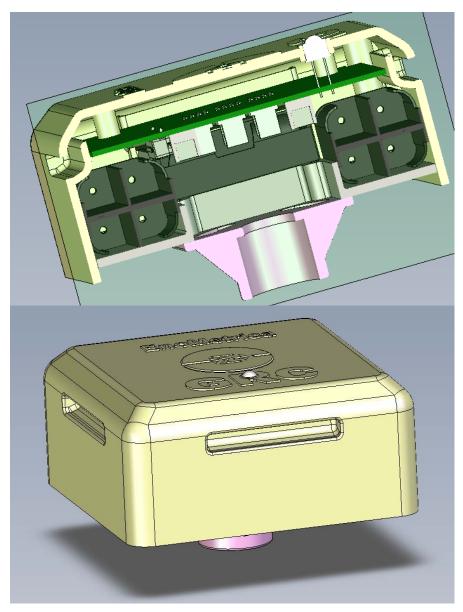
Solidwoks 3D Drawings of the Sensor Node
